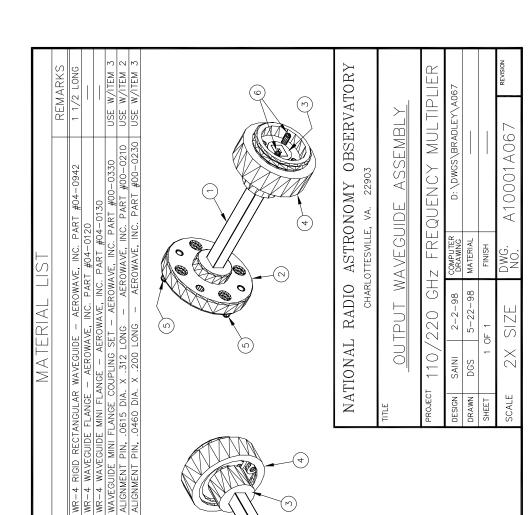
110/220 GHz frequency doubler: WR-4 output waveguide flange adapter assembly.
